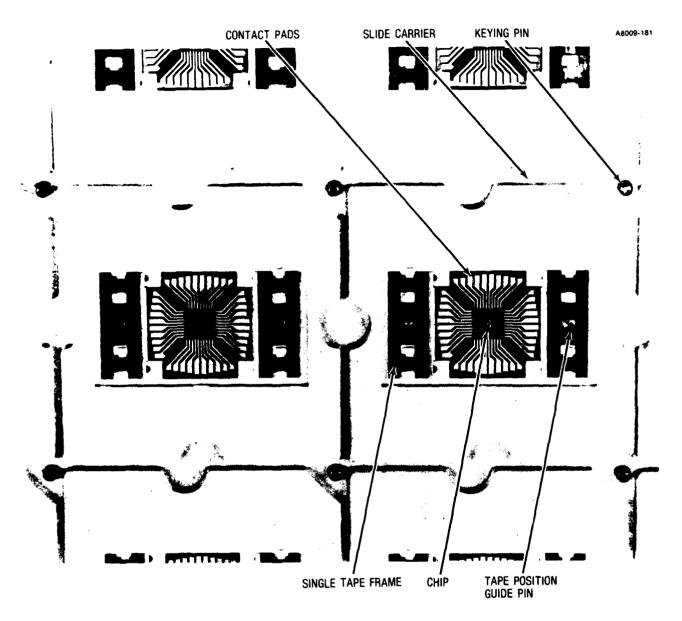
Chip on Single Frame Mounted in Slide Carrier
